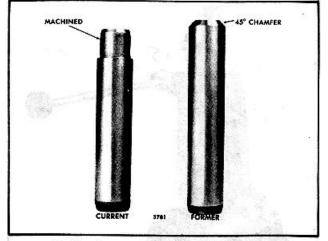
Former and Current Valve Guides A service replacement valve guide which is .016" oversize on the outside diameter is also provided for service.
